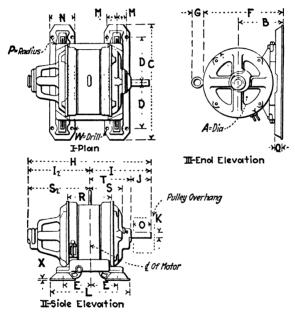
Showing the principal dimensions of a motor which are usually given on the manufacturers' dimension data sheet.
